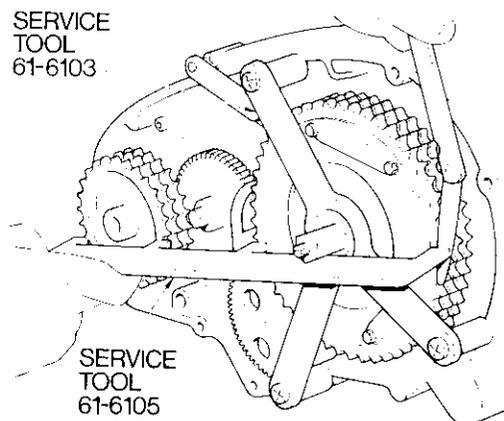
Location of Service Tool 61-6105. Measuring clearance between shock absorber sprocket and gauge.
